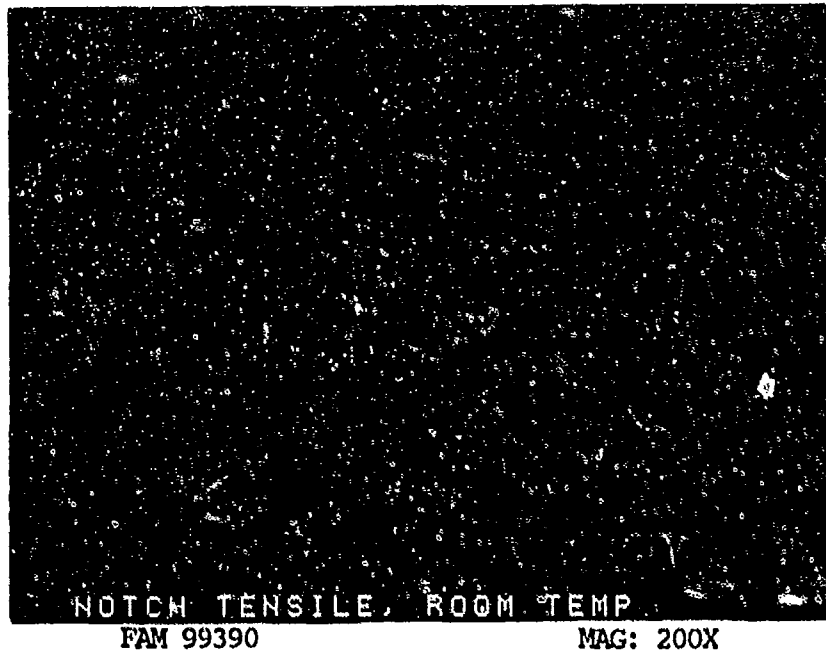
Higher magnification photograph of the center of the fracture surface.
